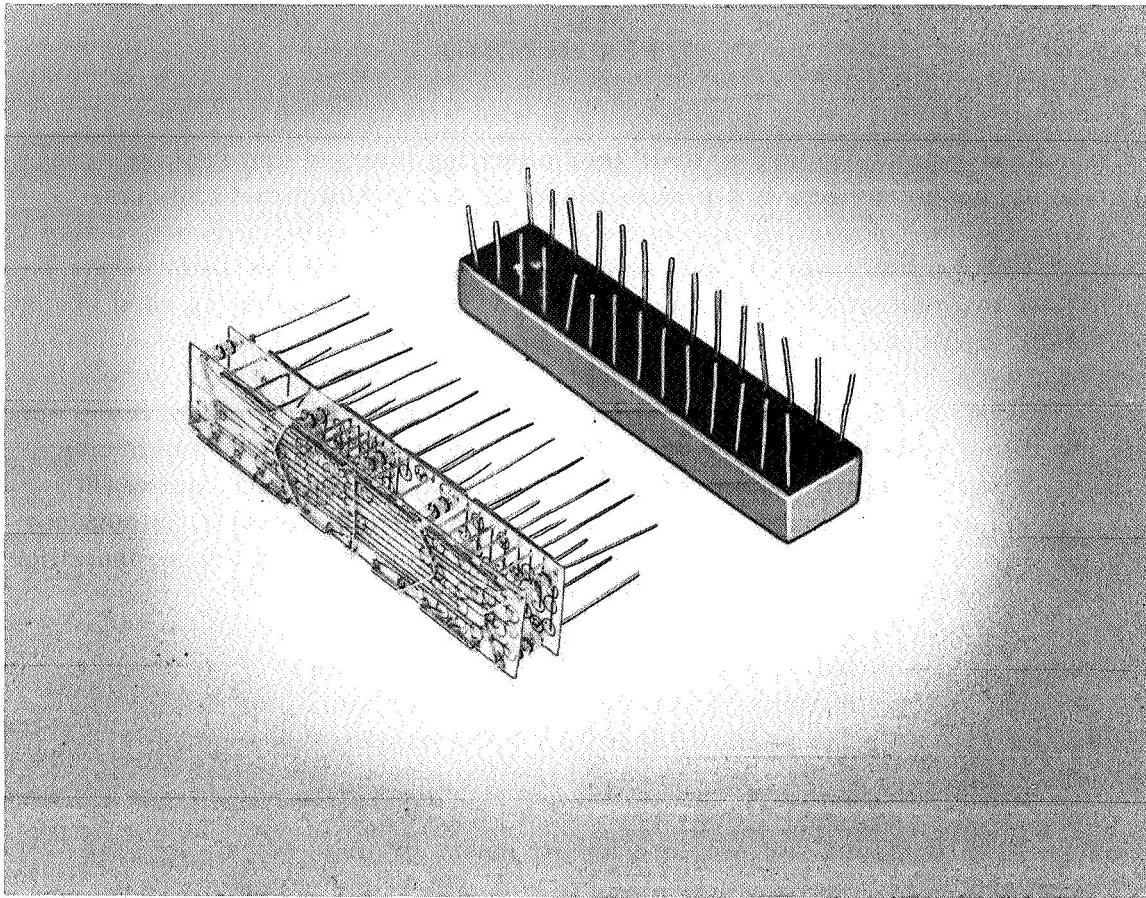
TYPICAL TRANSFER MOLDED MODULE
